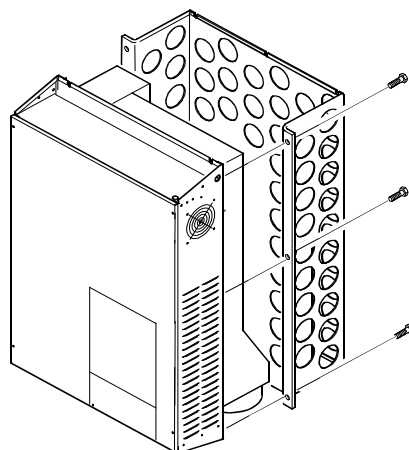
Removing the mounting plate in SINUS PENTA S50 for through-panel assembly
